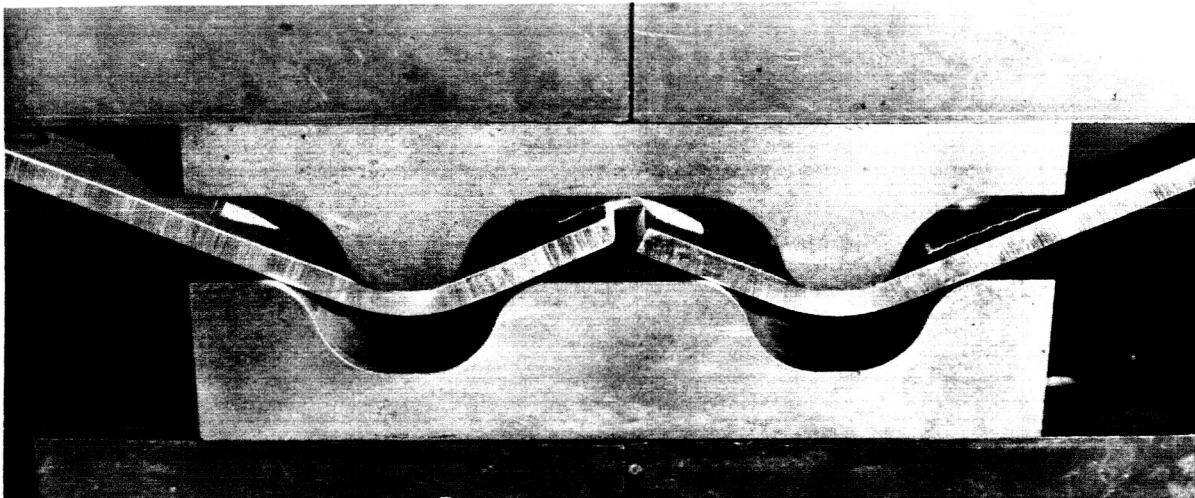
Seating 2219-0 Aluminum in Edge Clamp Fixture
